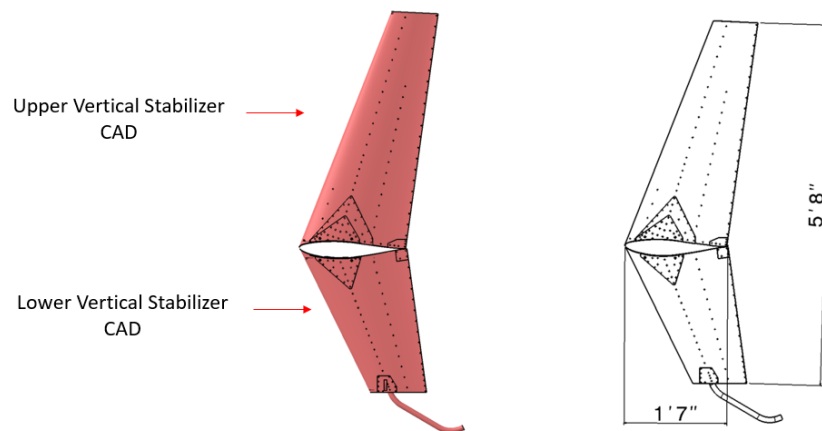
Part 27 Rotorcraft vertical stabilizer CAD overall dimensions.
